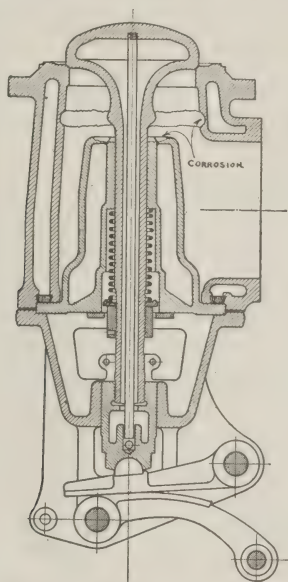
CORROSION OF VALVE CASING BY SULPHUR IN GAS
